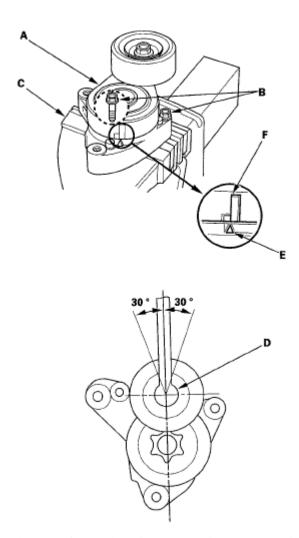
Clamping Auto-Tensioner Bolts And Vise
